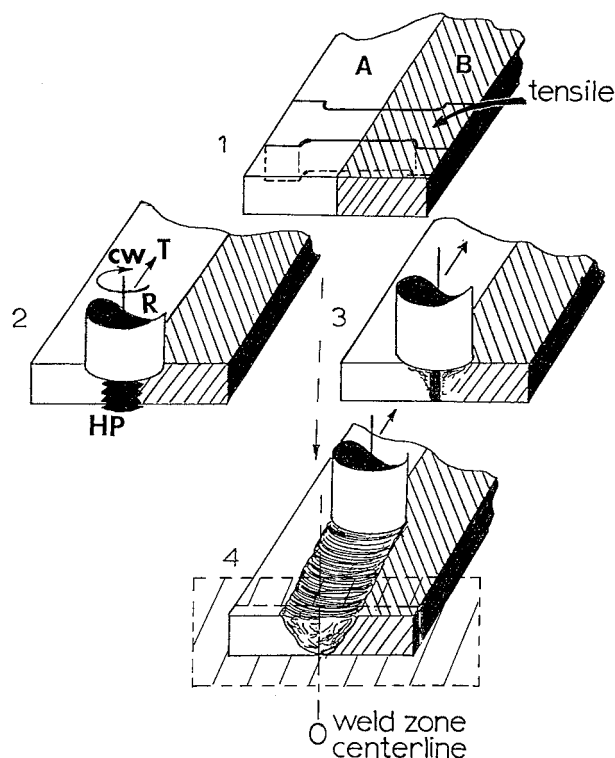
Friction-stir weld schematic showing welding parameters. With a counter-clockwise rotation, the shaded side advances into the unshaded side. The right side of the weld (4) is therefore the advancing side. The tool (or head-pin) is designated HP. In (1) tensile refers to the tensile specimen configuration for workpiece and FSW specimens. In (4) the dotted plane illustrates the FSW section.
